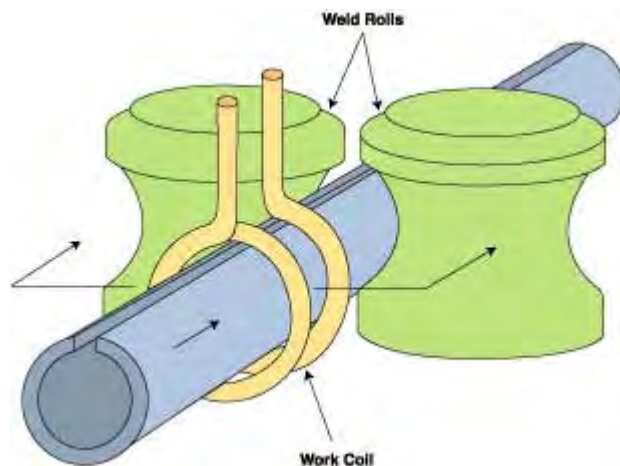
L-8: HF induction seam welding of a tube.
